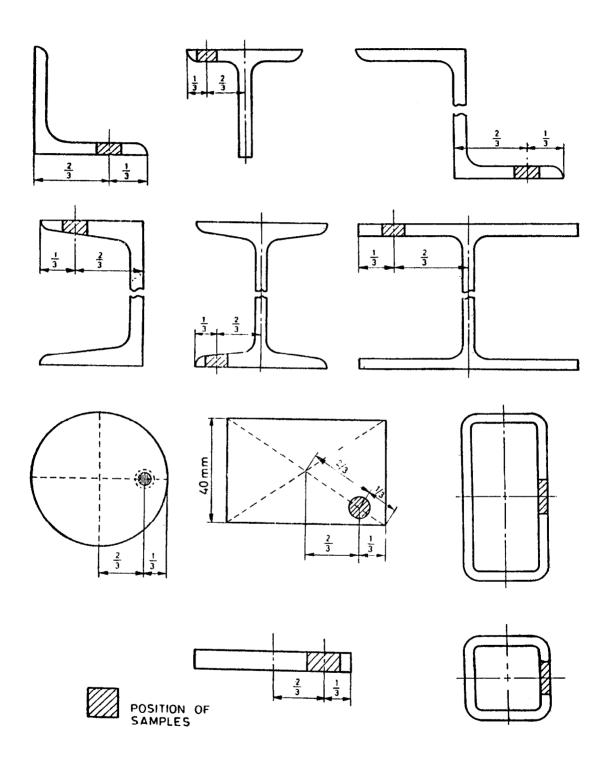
STRUCTURAL STEEL SECTIONS, POSITION AND ORIENTATION OF SAMPLES
